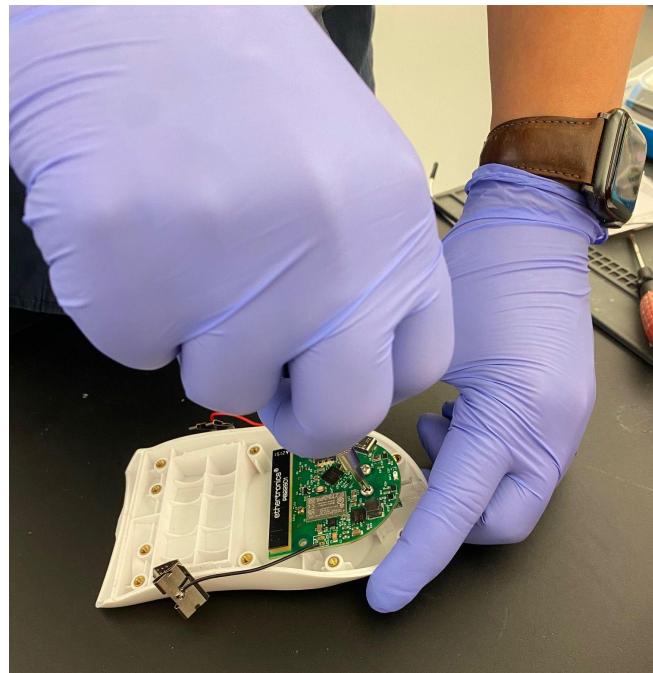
Securing PCB onto housing with 12mm self-tapping screws
